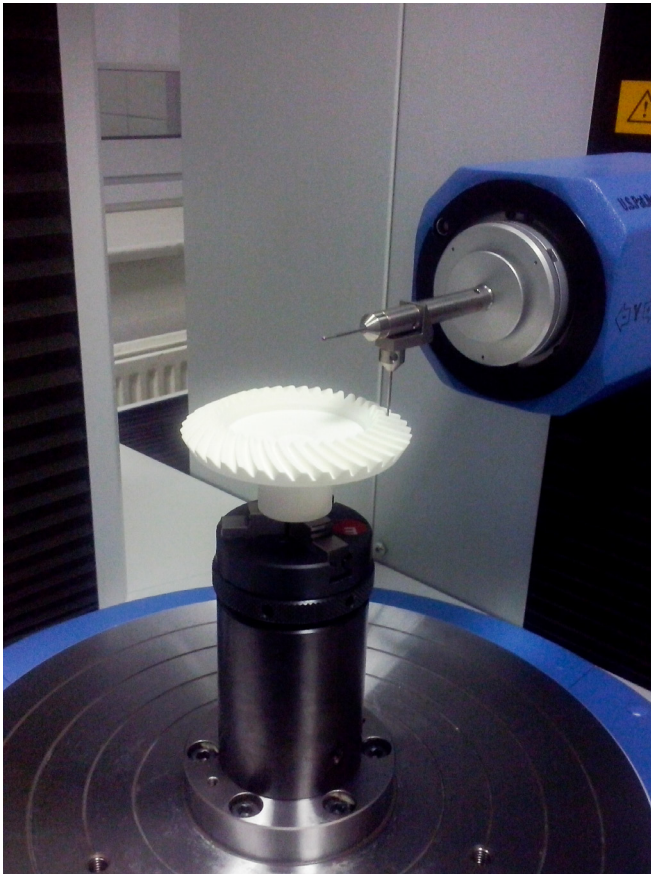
Measurement of a spiral bevel gear made with the SLS method on the Klingelnberg coordinate measuring machine P40
